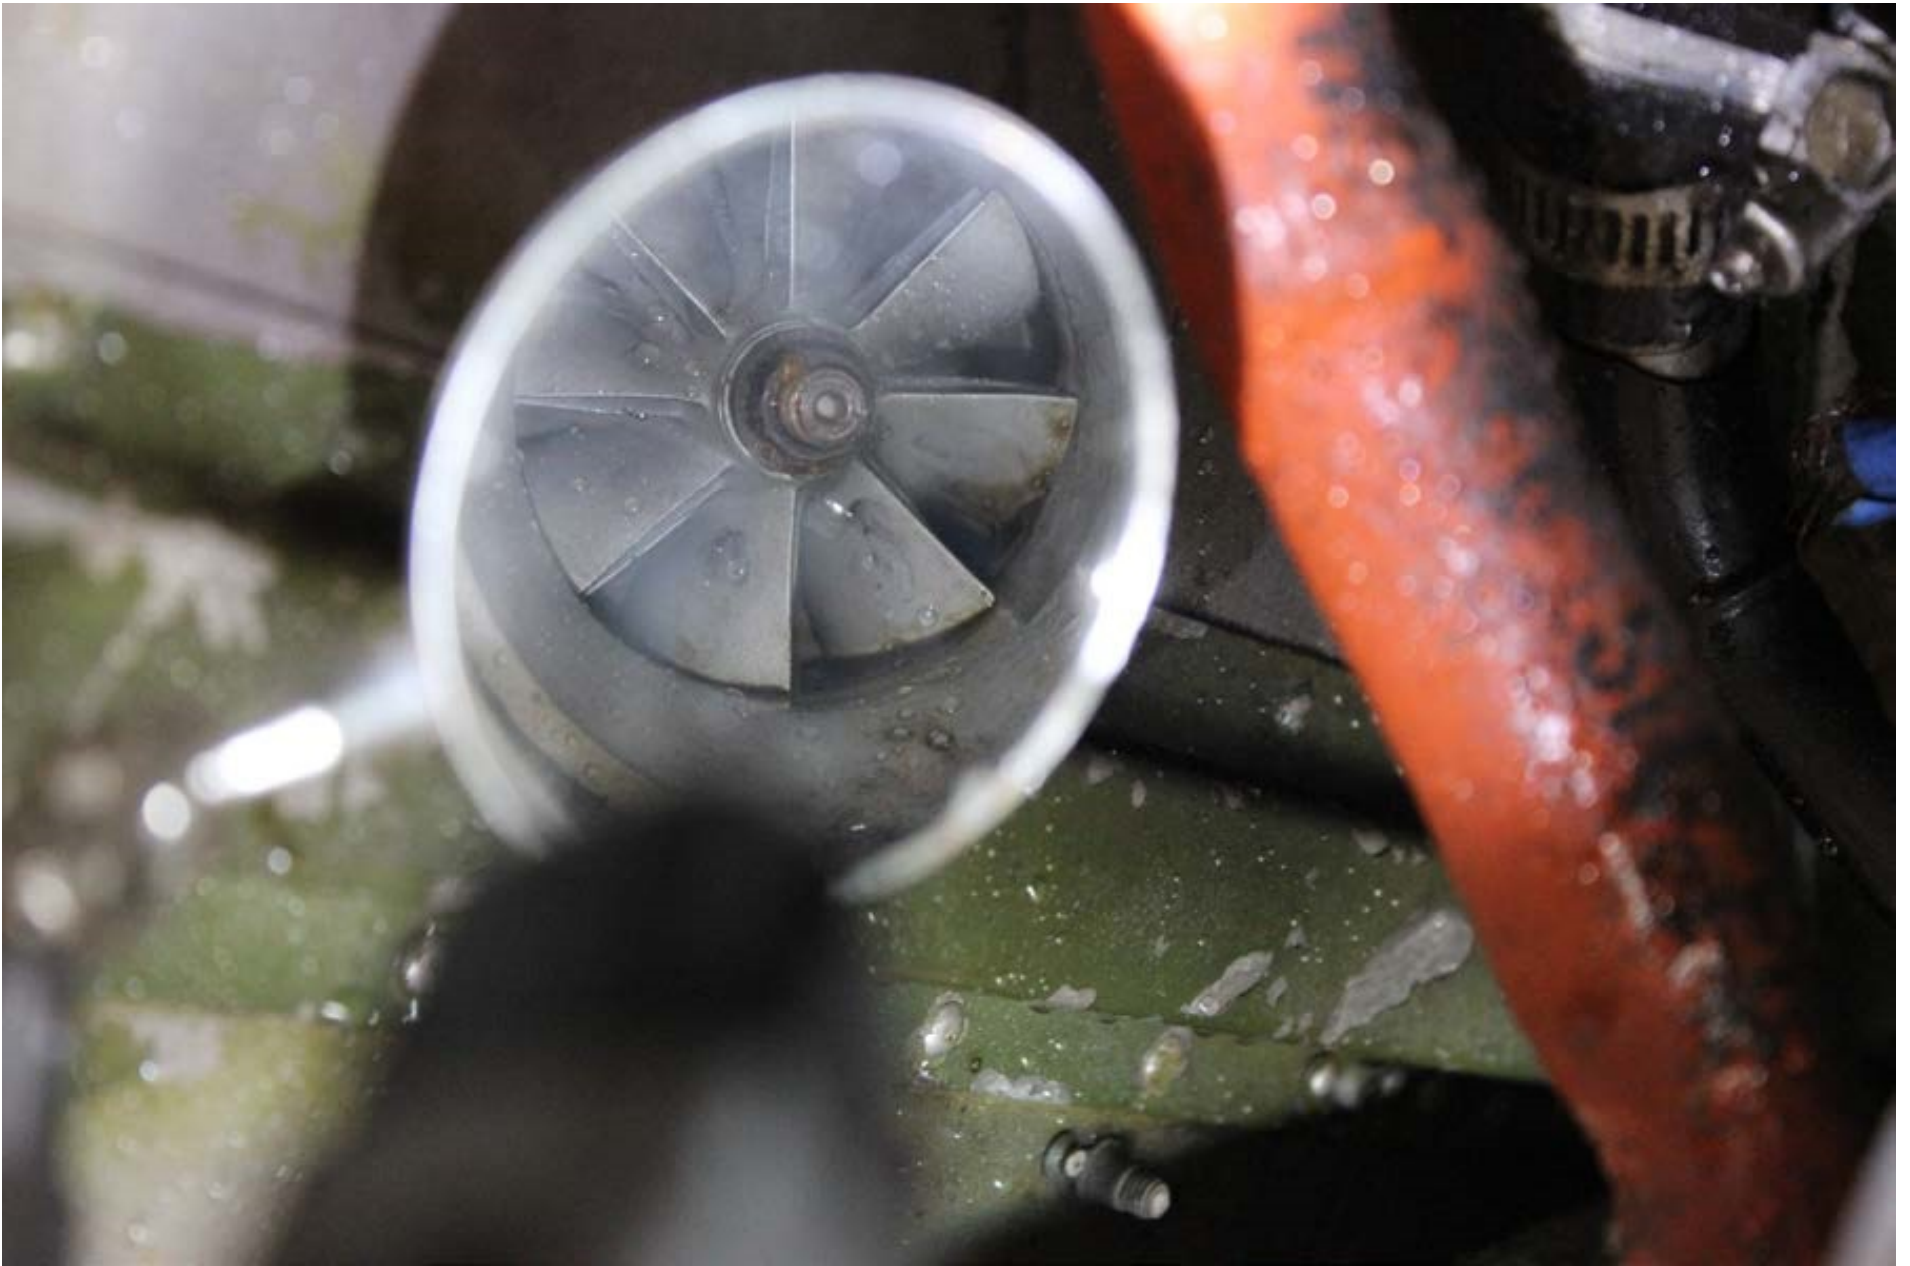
Supplied close-up photo of the turbocharger inlet.
